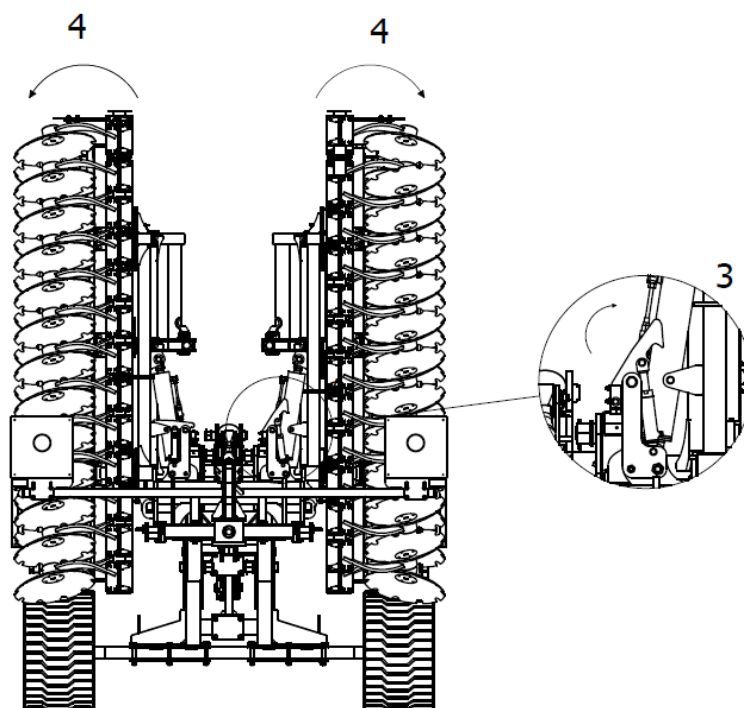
Machine opening sequence: 3- release the hook of the hydraulic wing lock mechanism 4- open the wings of the machine.
